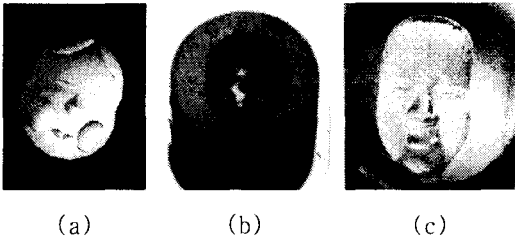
(a) CAD Mask, (b) Micro Machining Sample (Metal) (c) Micro Machining Sample (Glass)
